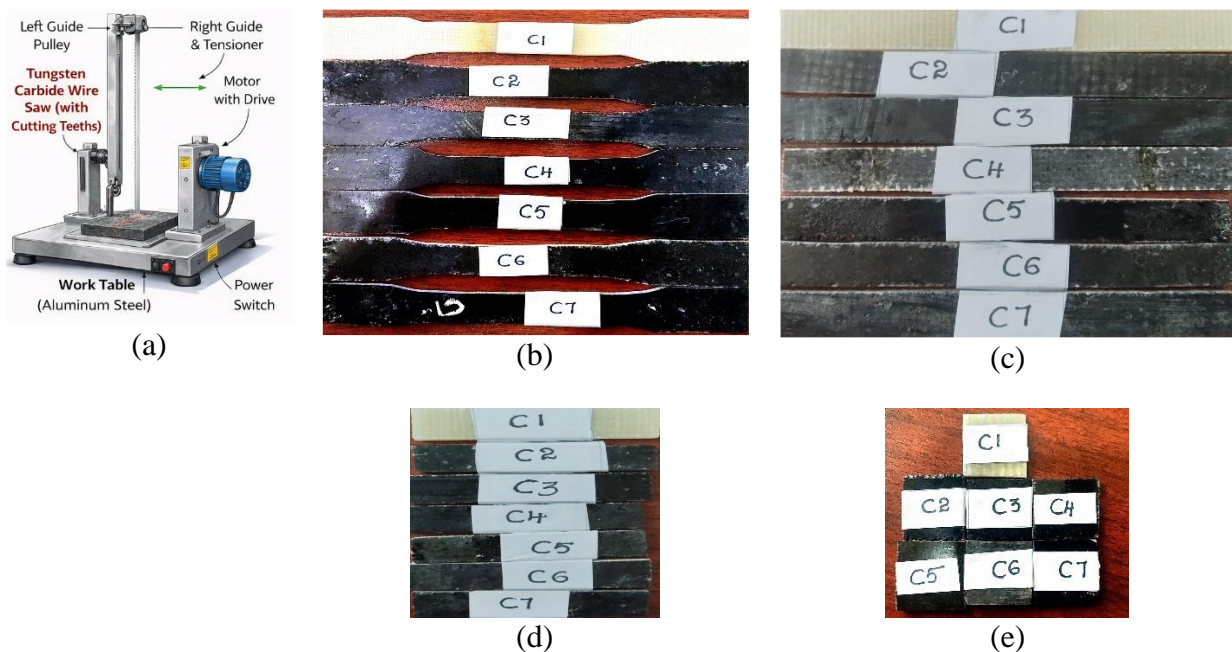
(a) Composite Machining Setup, (b) Tensile Test Specimens, (c) Flexural Test Specimens, (d) Impact Test Specimens, (e) Hardness Test Specimens
